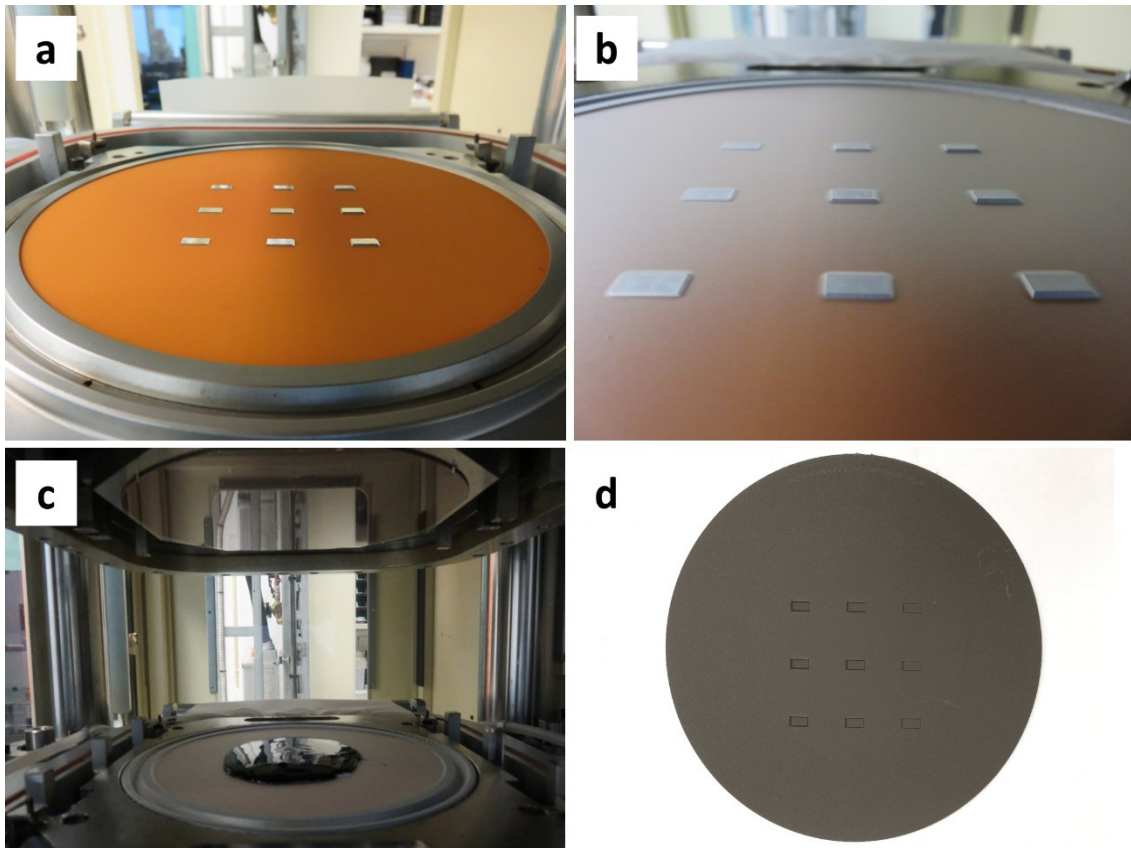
Molding process for inlays; a) inlay on base; b) FAM tape drawn over inlays (vacuum); c) EMC on FAM tape right before molding; d) view of formed cavities in EMC
